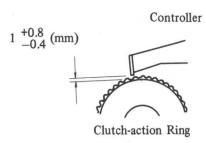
Paper Feed Cam Drive Disassembly (D)
